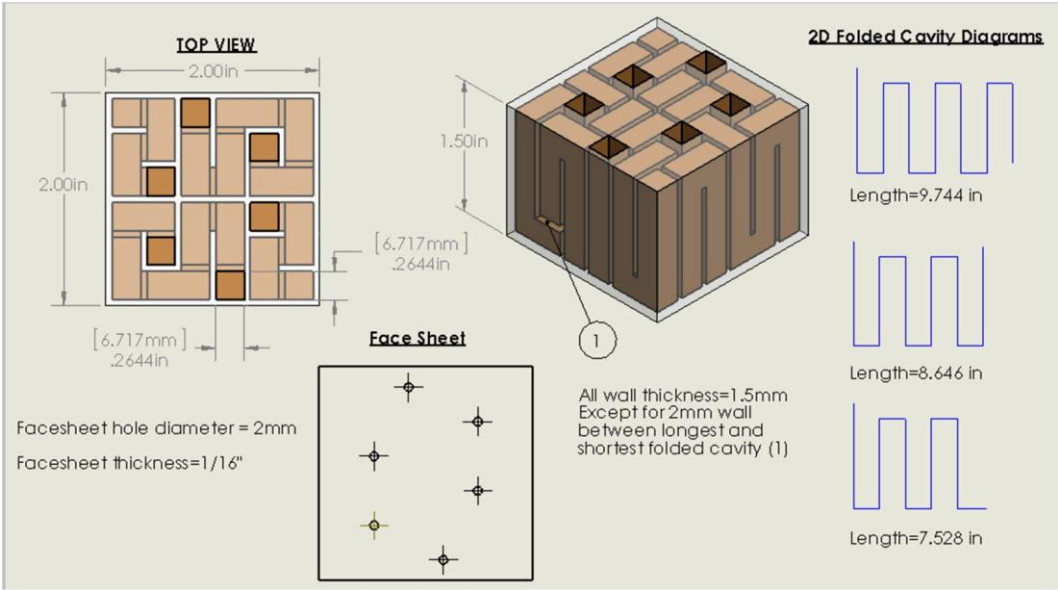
CAD drawing for the optimized 3D folded cavity liner design [37].
